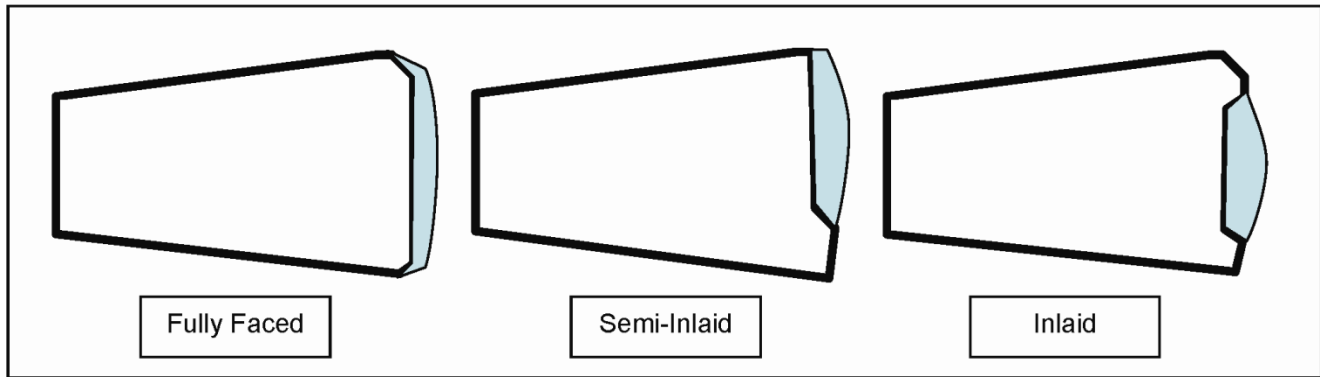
PISTON RING COATING APPLICATION EXAMPLES
